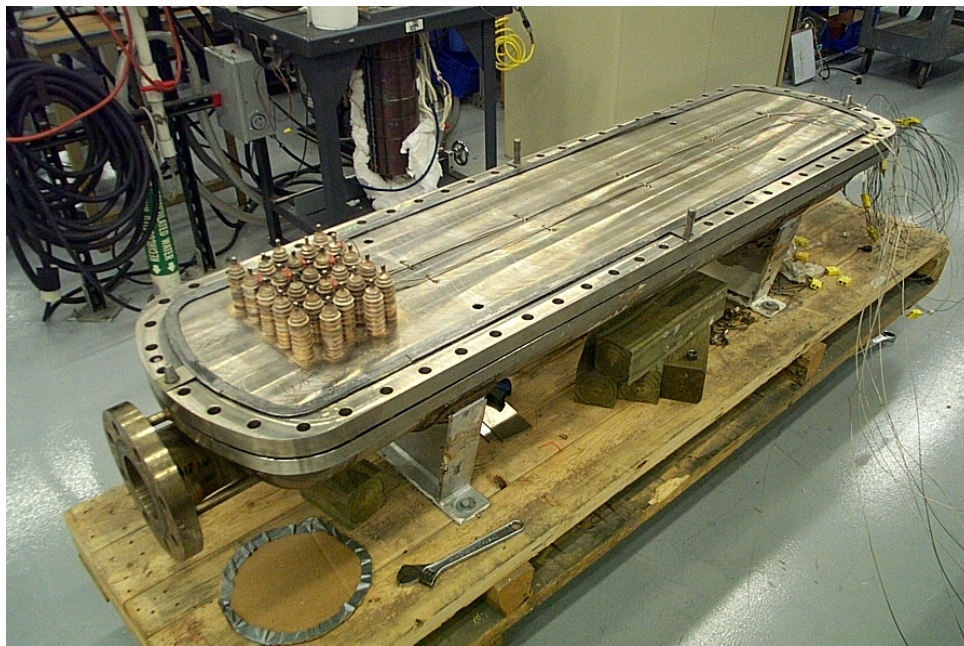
Fabrication of 25 Pipe Coupon At Thermacore
